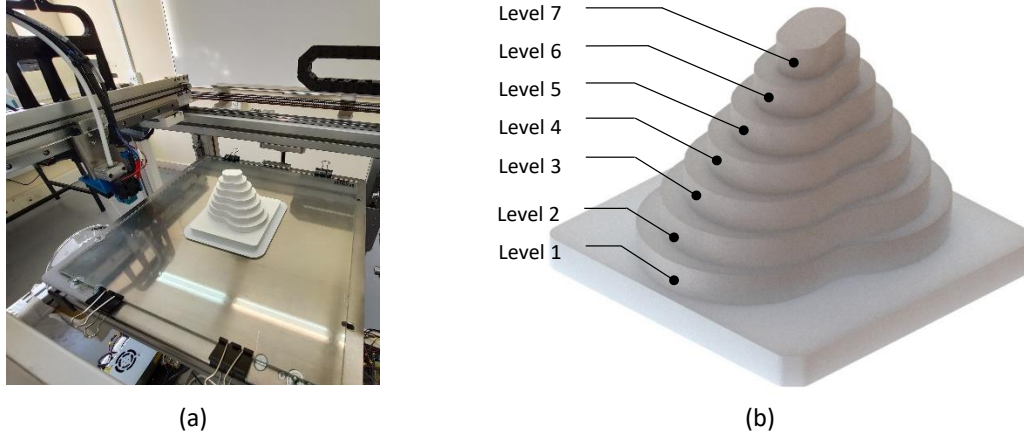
(a) The test part in the FFF machine; (b) test part geometry.
